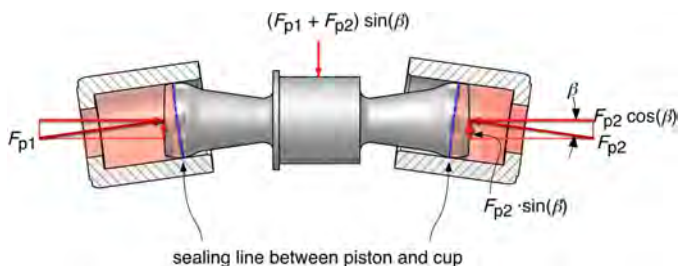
Piston loads on a single piston pair of a floating cup machine.
